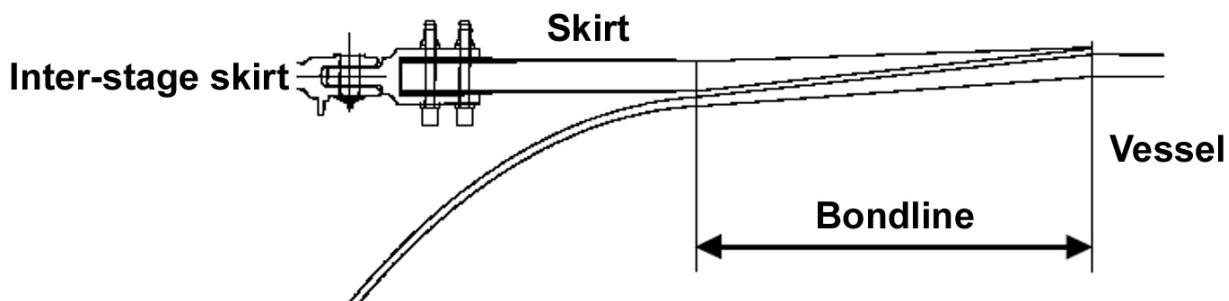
Case study: SRM – example of flexible joint design
